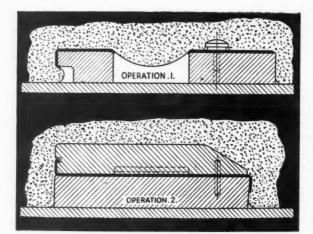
Illustration of method of forming lipped and reversed flanges.
